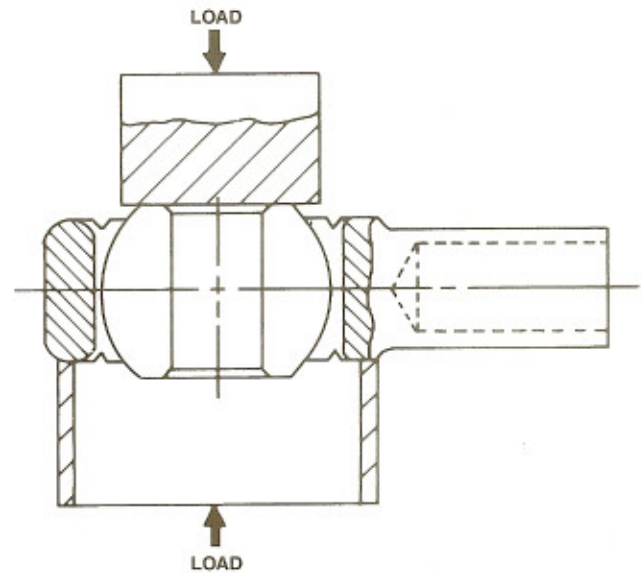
STAKING BEARING PROOF LOAD TEST METHOD
